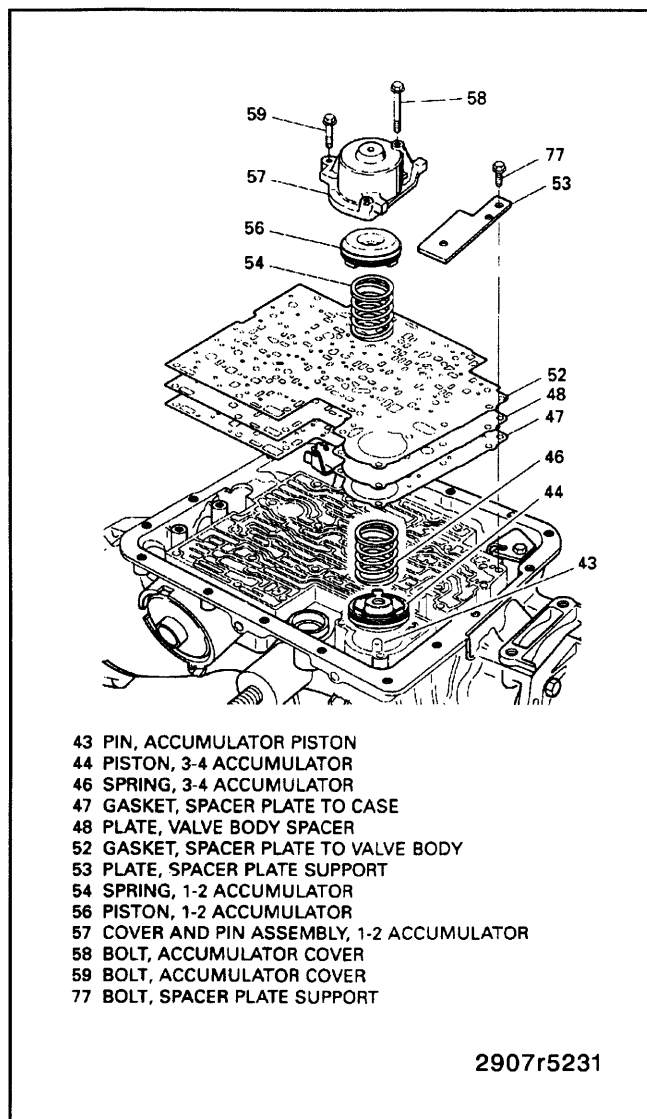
Accumulator Assembly, Spacer Plate, and Gaskets
